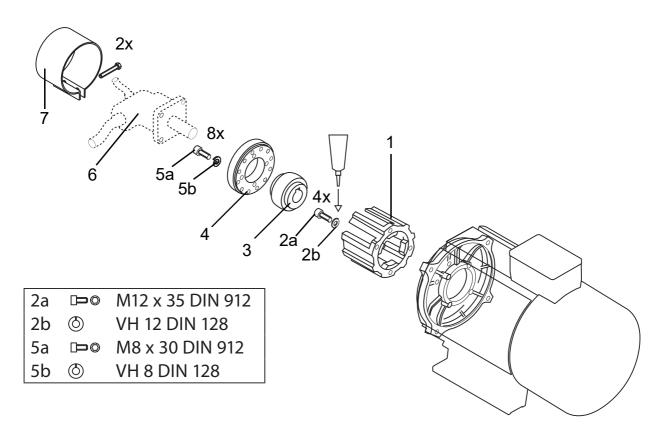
Assembly of flange mount hydraulic drive (BG 160 model)
